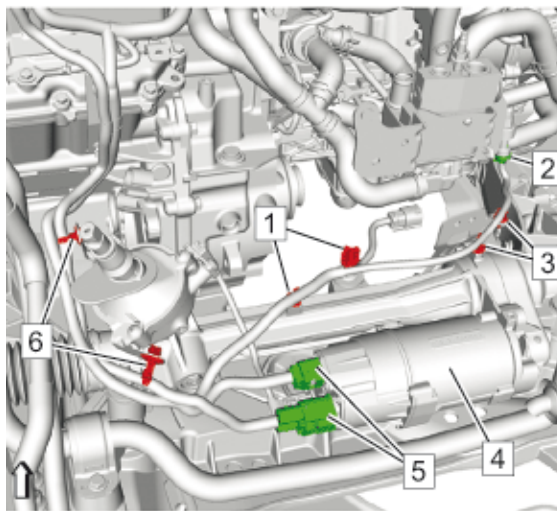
Power Steering Assist Motor, Electrical Connectors And Wiring Harness Clips
